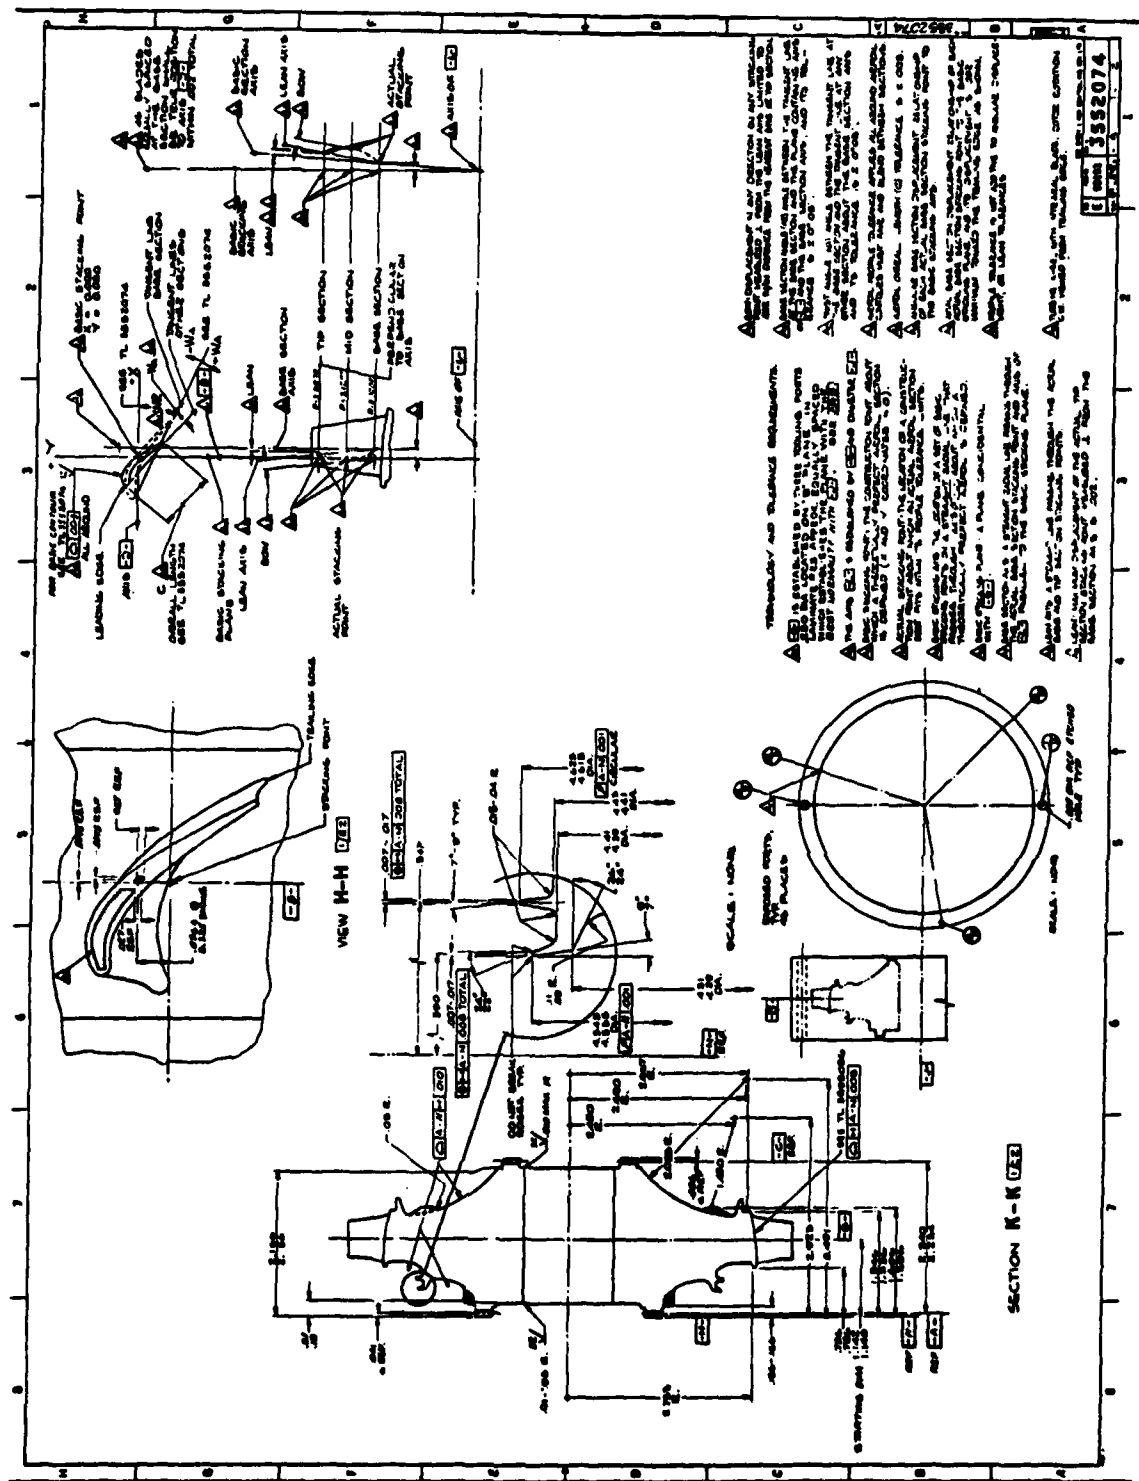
Small Cruise Missile Laminated Turbine Rotor Detail Assembly Drawing.
